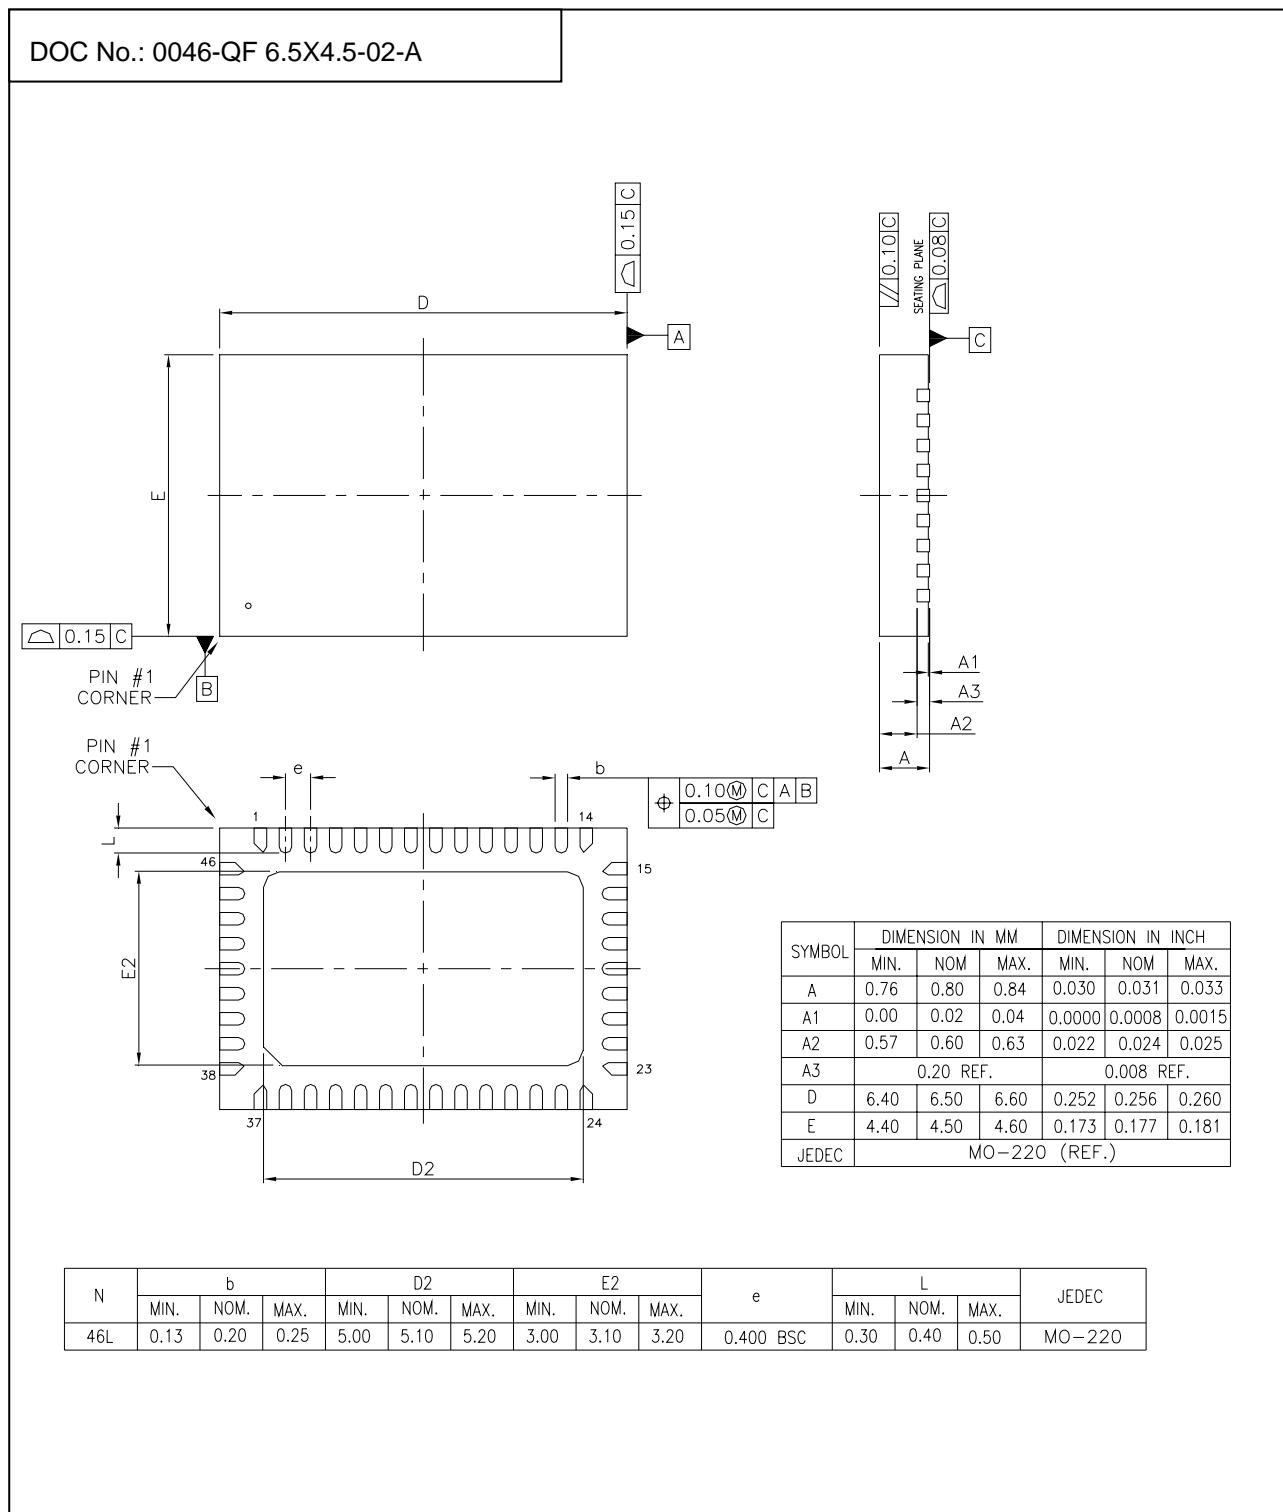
46 Pin QFN 6.5 x 4.5 x 0.8 mm Package Outline Dimension
